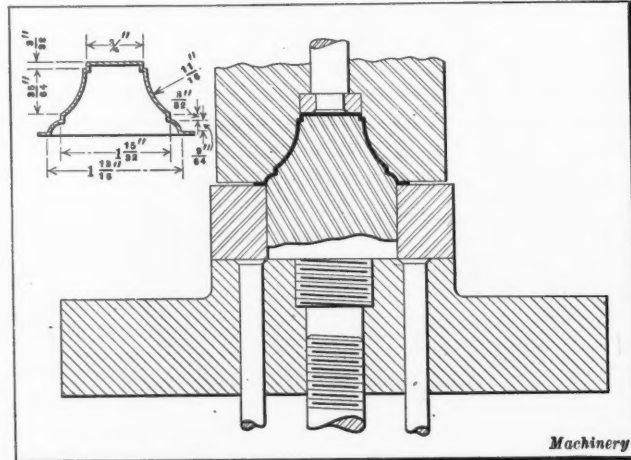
Finishing Die for the Shell produced by the Die shown in Fig. 3
